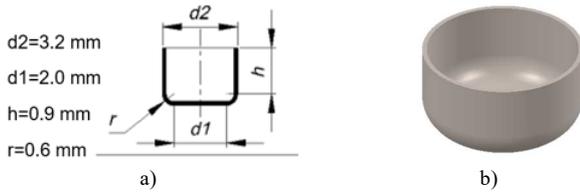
Detailed geometrical parameters of the connector head: a) 2D product dimensions b) 3D product model
